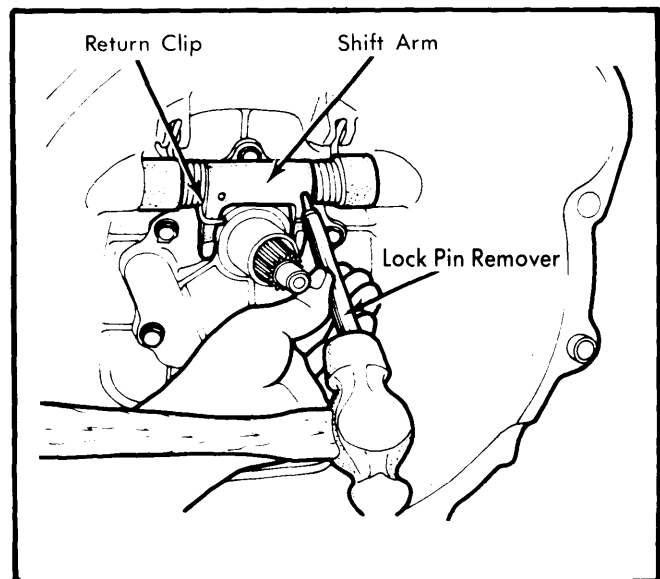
Using a $\frac{3}{16}$ " Punch to Remove Shift Arm Spring Pin
